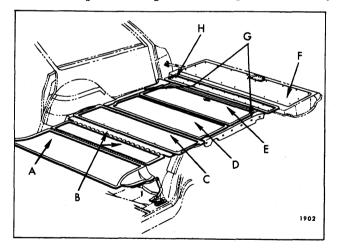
Folding Seat and Floor Panels Pontiac "B-35" Styles
